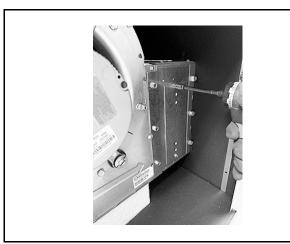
Unscrew and Remove the Heater Collar Cover Plates
